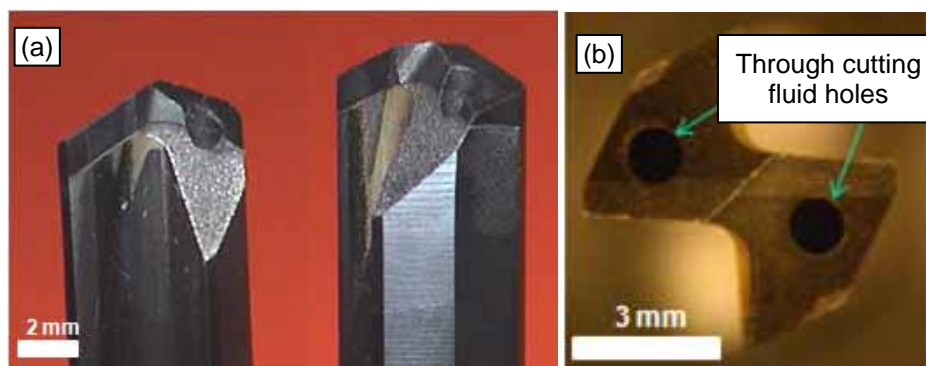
Straight fluted PCD drills used in Phase 3A: (a) side view and (b) end view
